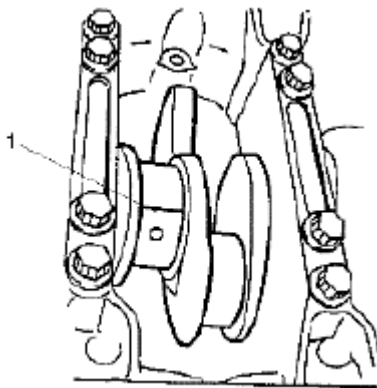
Identifying Paint Mark For Bearing Size Identification
